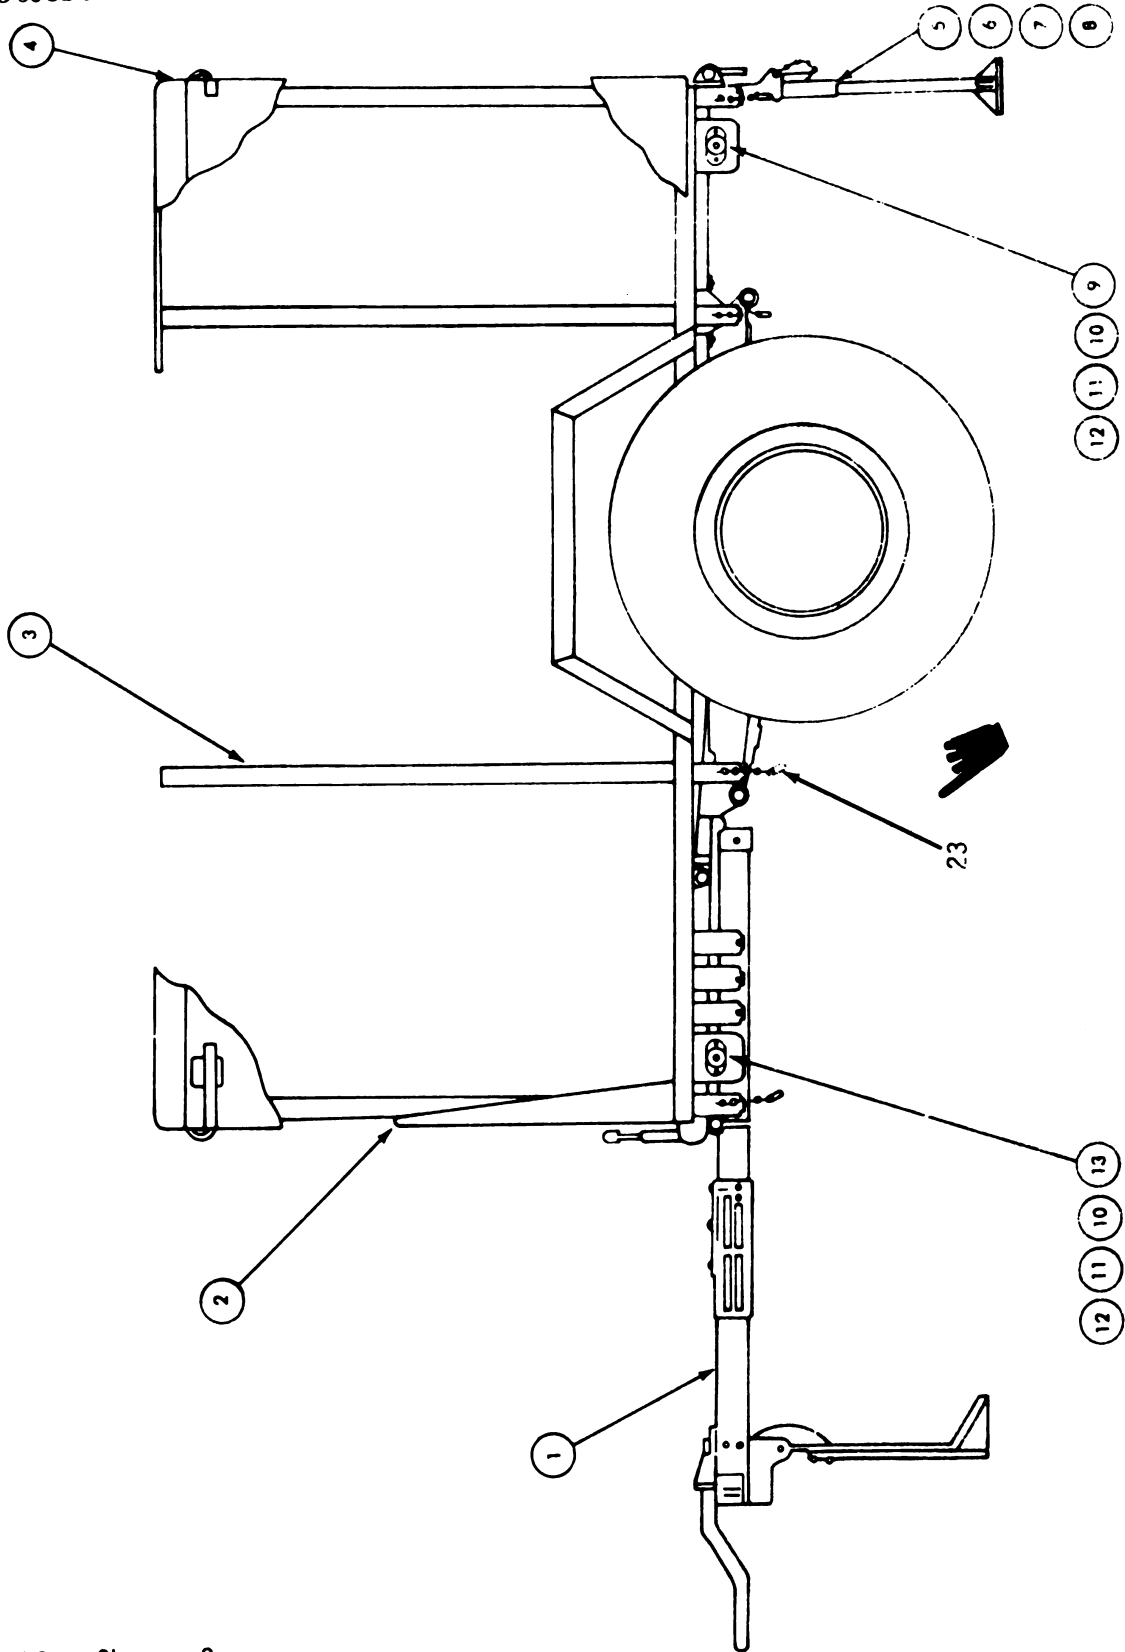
Trailer, Side, Top and Rear Views (Sheet 1 of 3)
